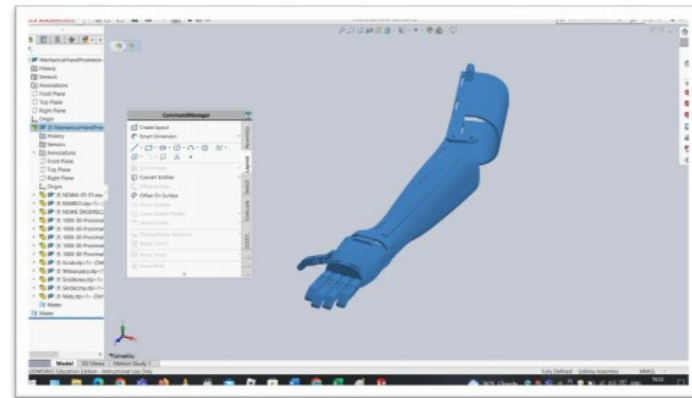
Robotic arm assembly – ASM, SLDASM. File
